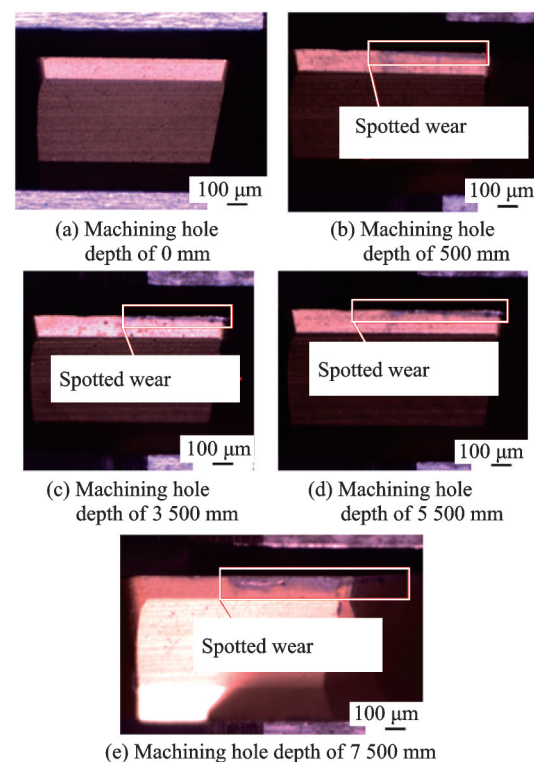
Partial wear state diagrams of inner cutting edge flank face
